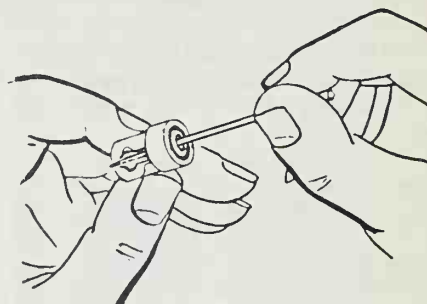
Use a pointed hardwood stick to clean spray hole as shown.
